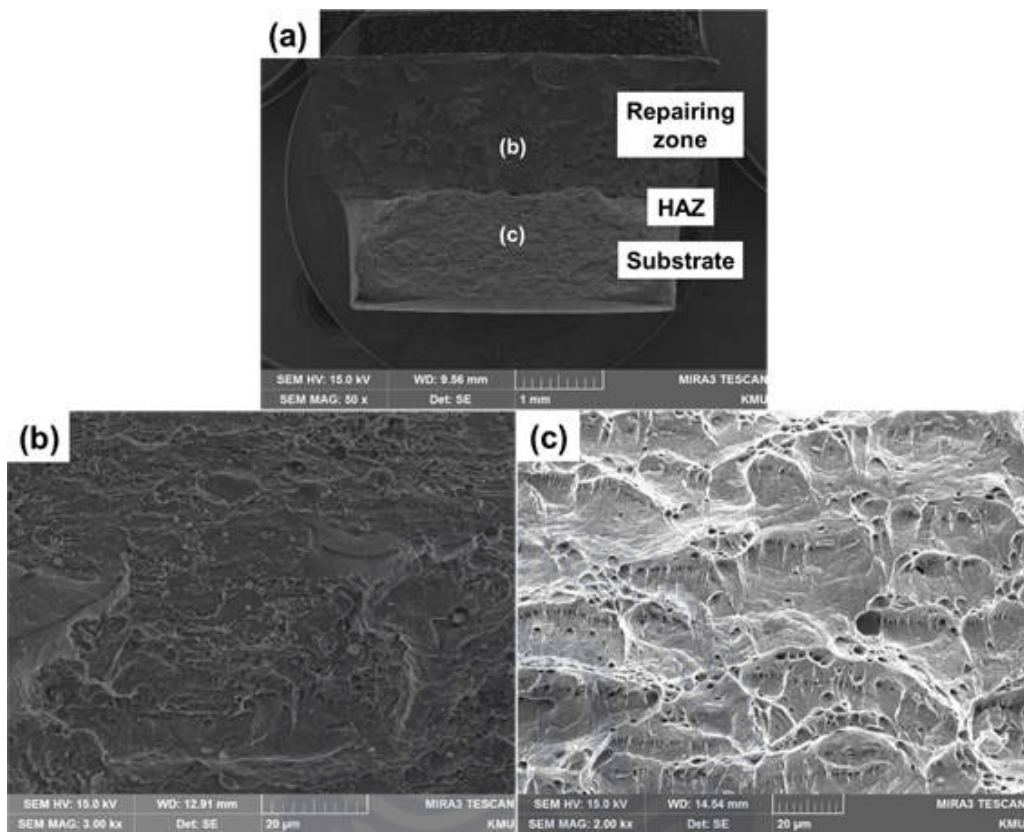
Fracture surface of tensile specimen without excess deposition:
